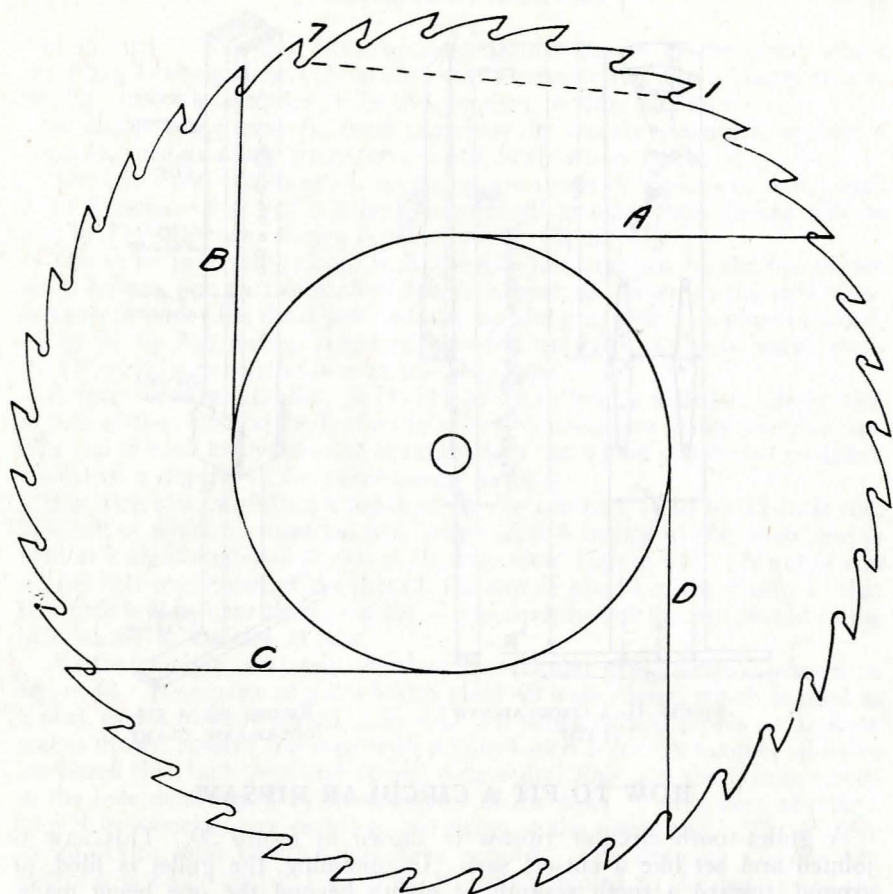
A GULLET-TOOTH CIRCULAR RIPSAW
